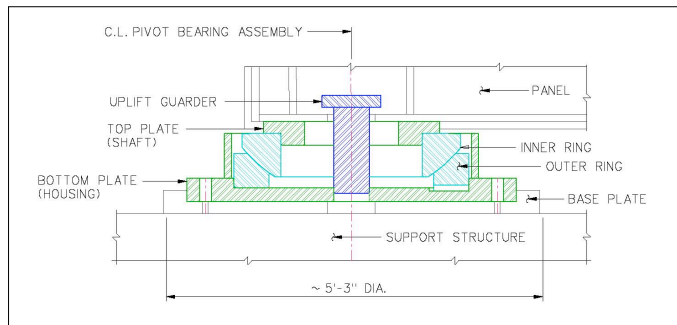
Original pivot bearing assembly with spherical plain thrust bearing - steel on steel.
